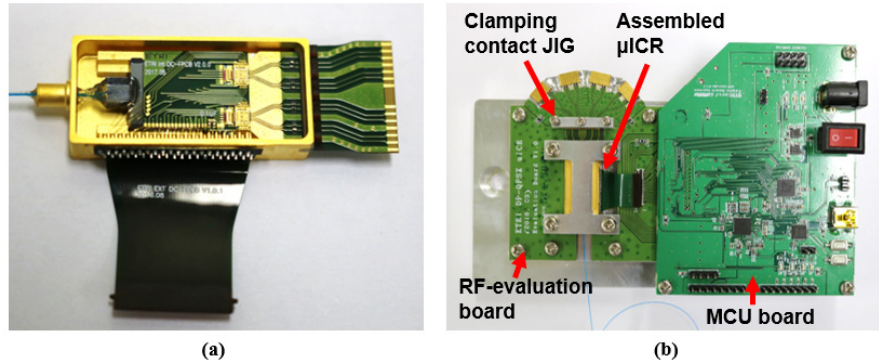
(a) Top view of our fabricated  $\mu$ ICR module and (b) the receiver module assembled using an RF evaluation board and an MCU board.
